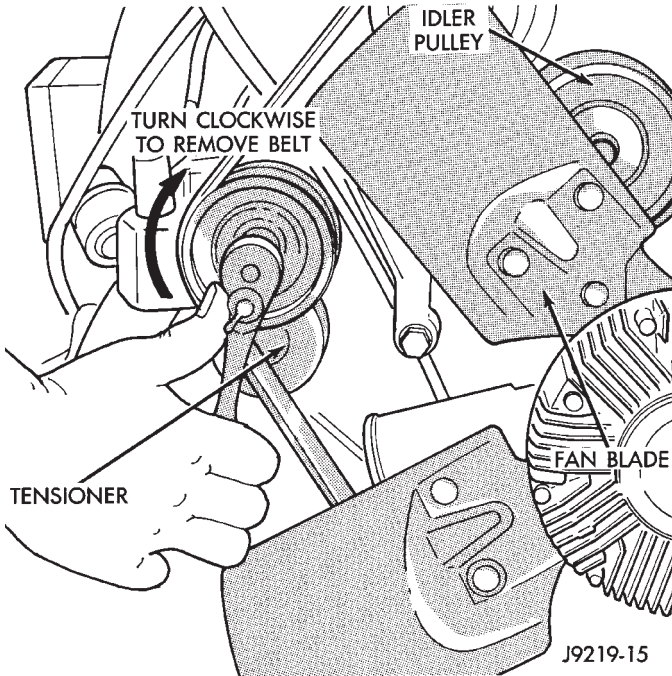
Automatic Belt Tensioner—3.9L/5.2L/5.9L Engine
